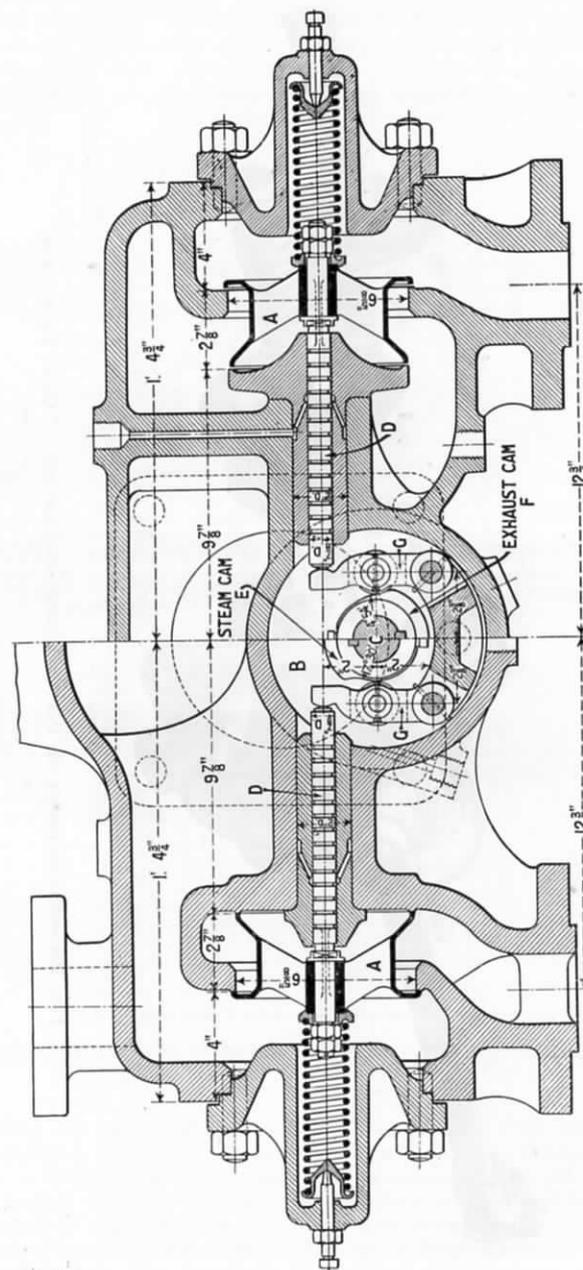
LONGITUDINAL SECTION THROUGH "A.L.E." VALVE GEAR; "O.C." TYPE.
